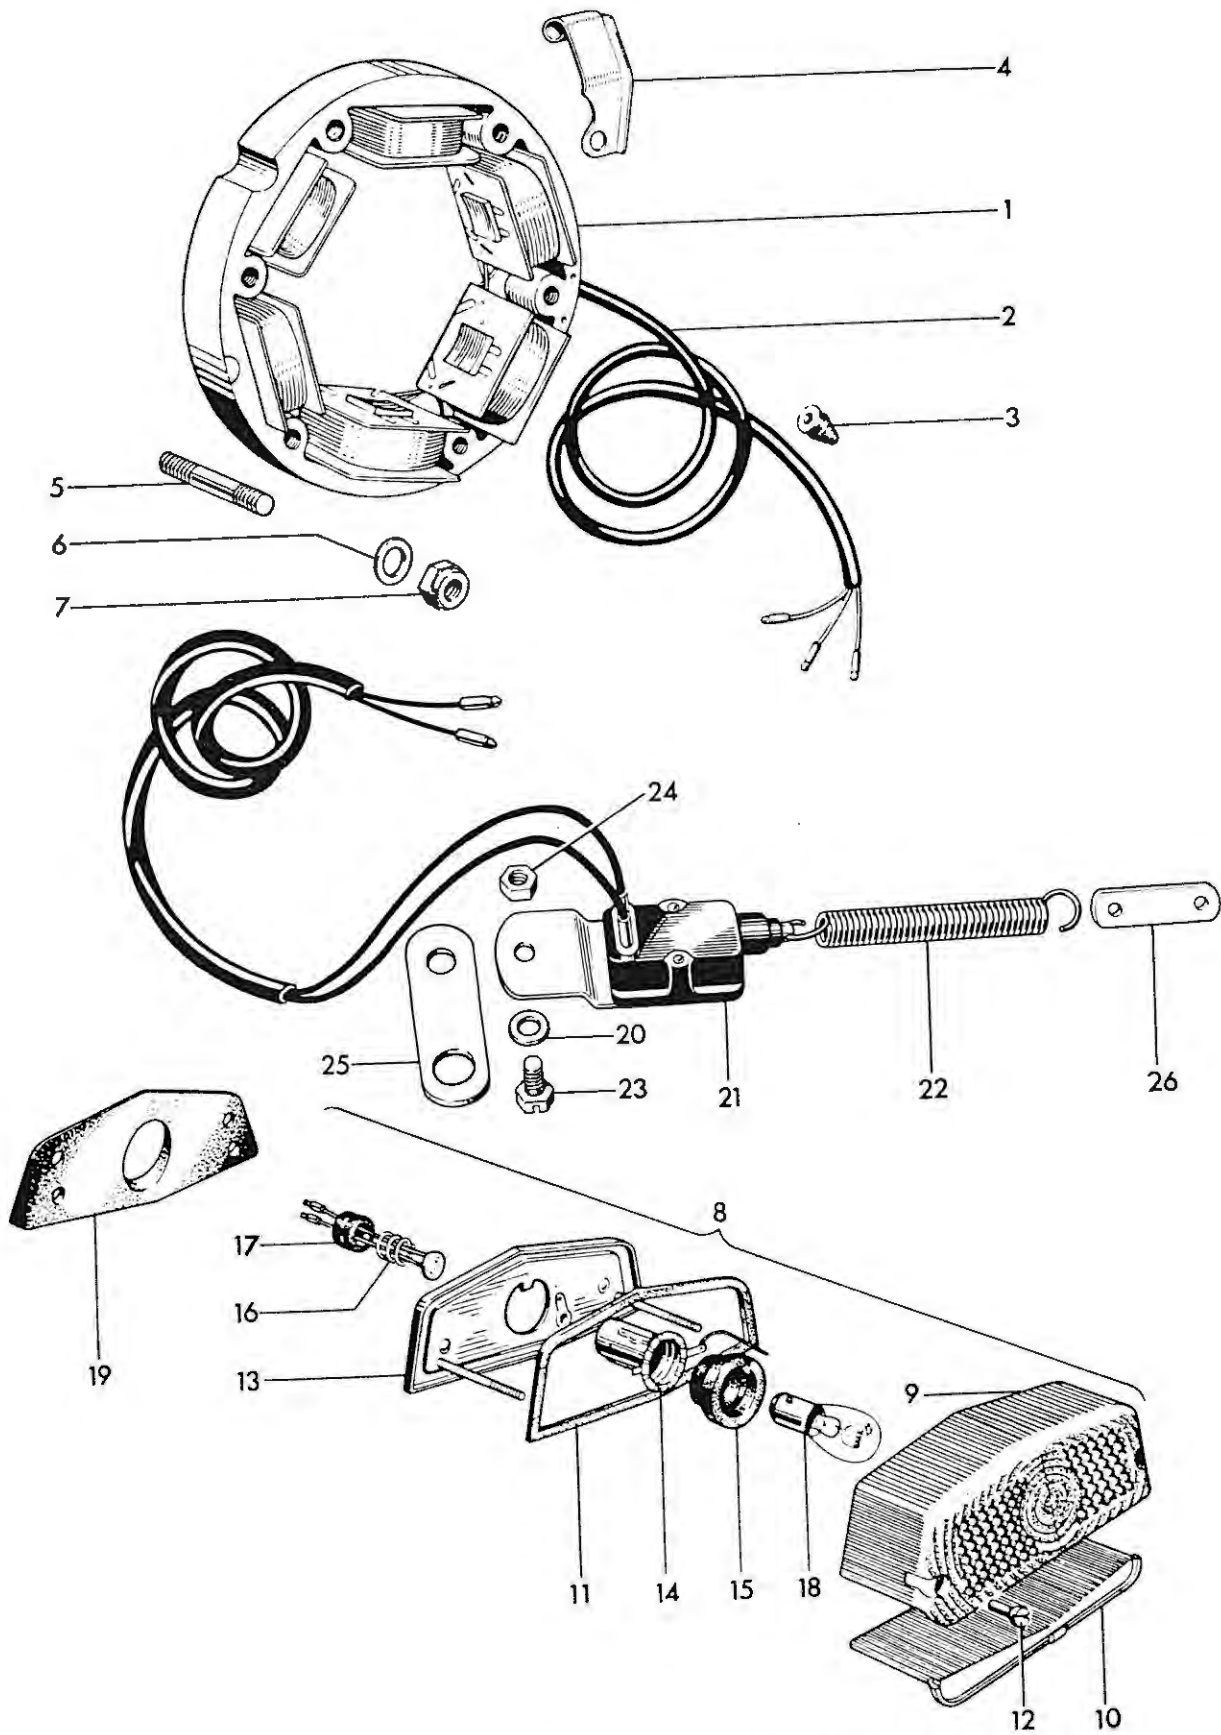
STATOR, TAIL LAMP AND STOP LAMP SWITCH
